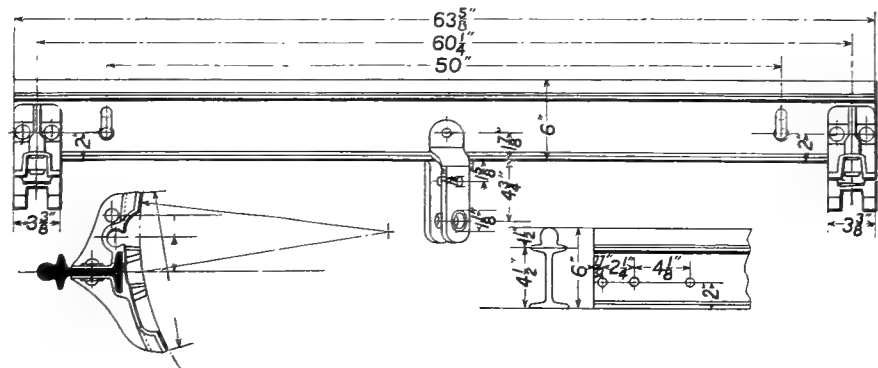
Special Combination Deck and I-Beam Section Brake Beam for Heavy Freight Service. Pennsylvania Brake Beam Company.
